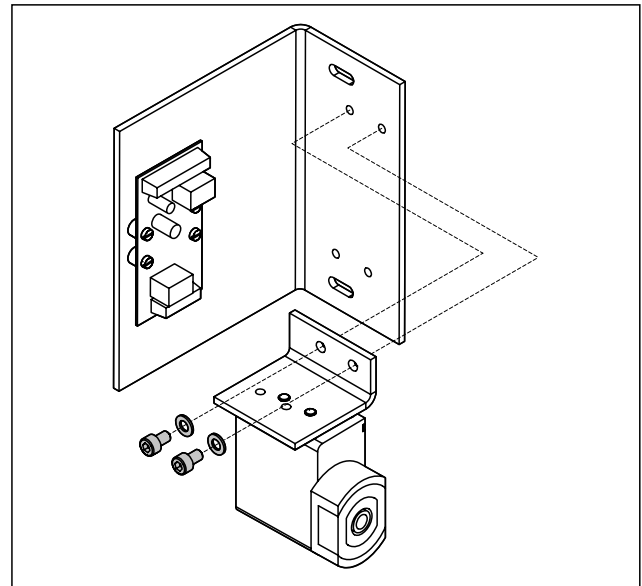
Screwing the hold-open magnet onto the fixing bracket
